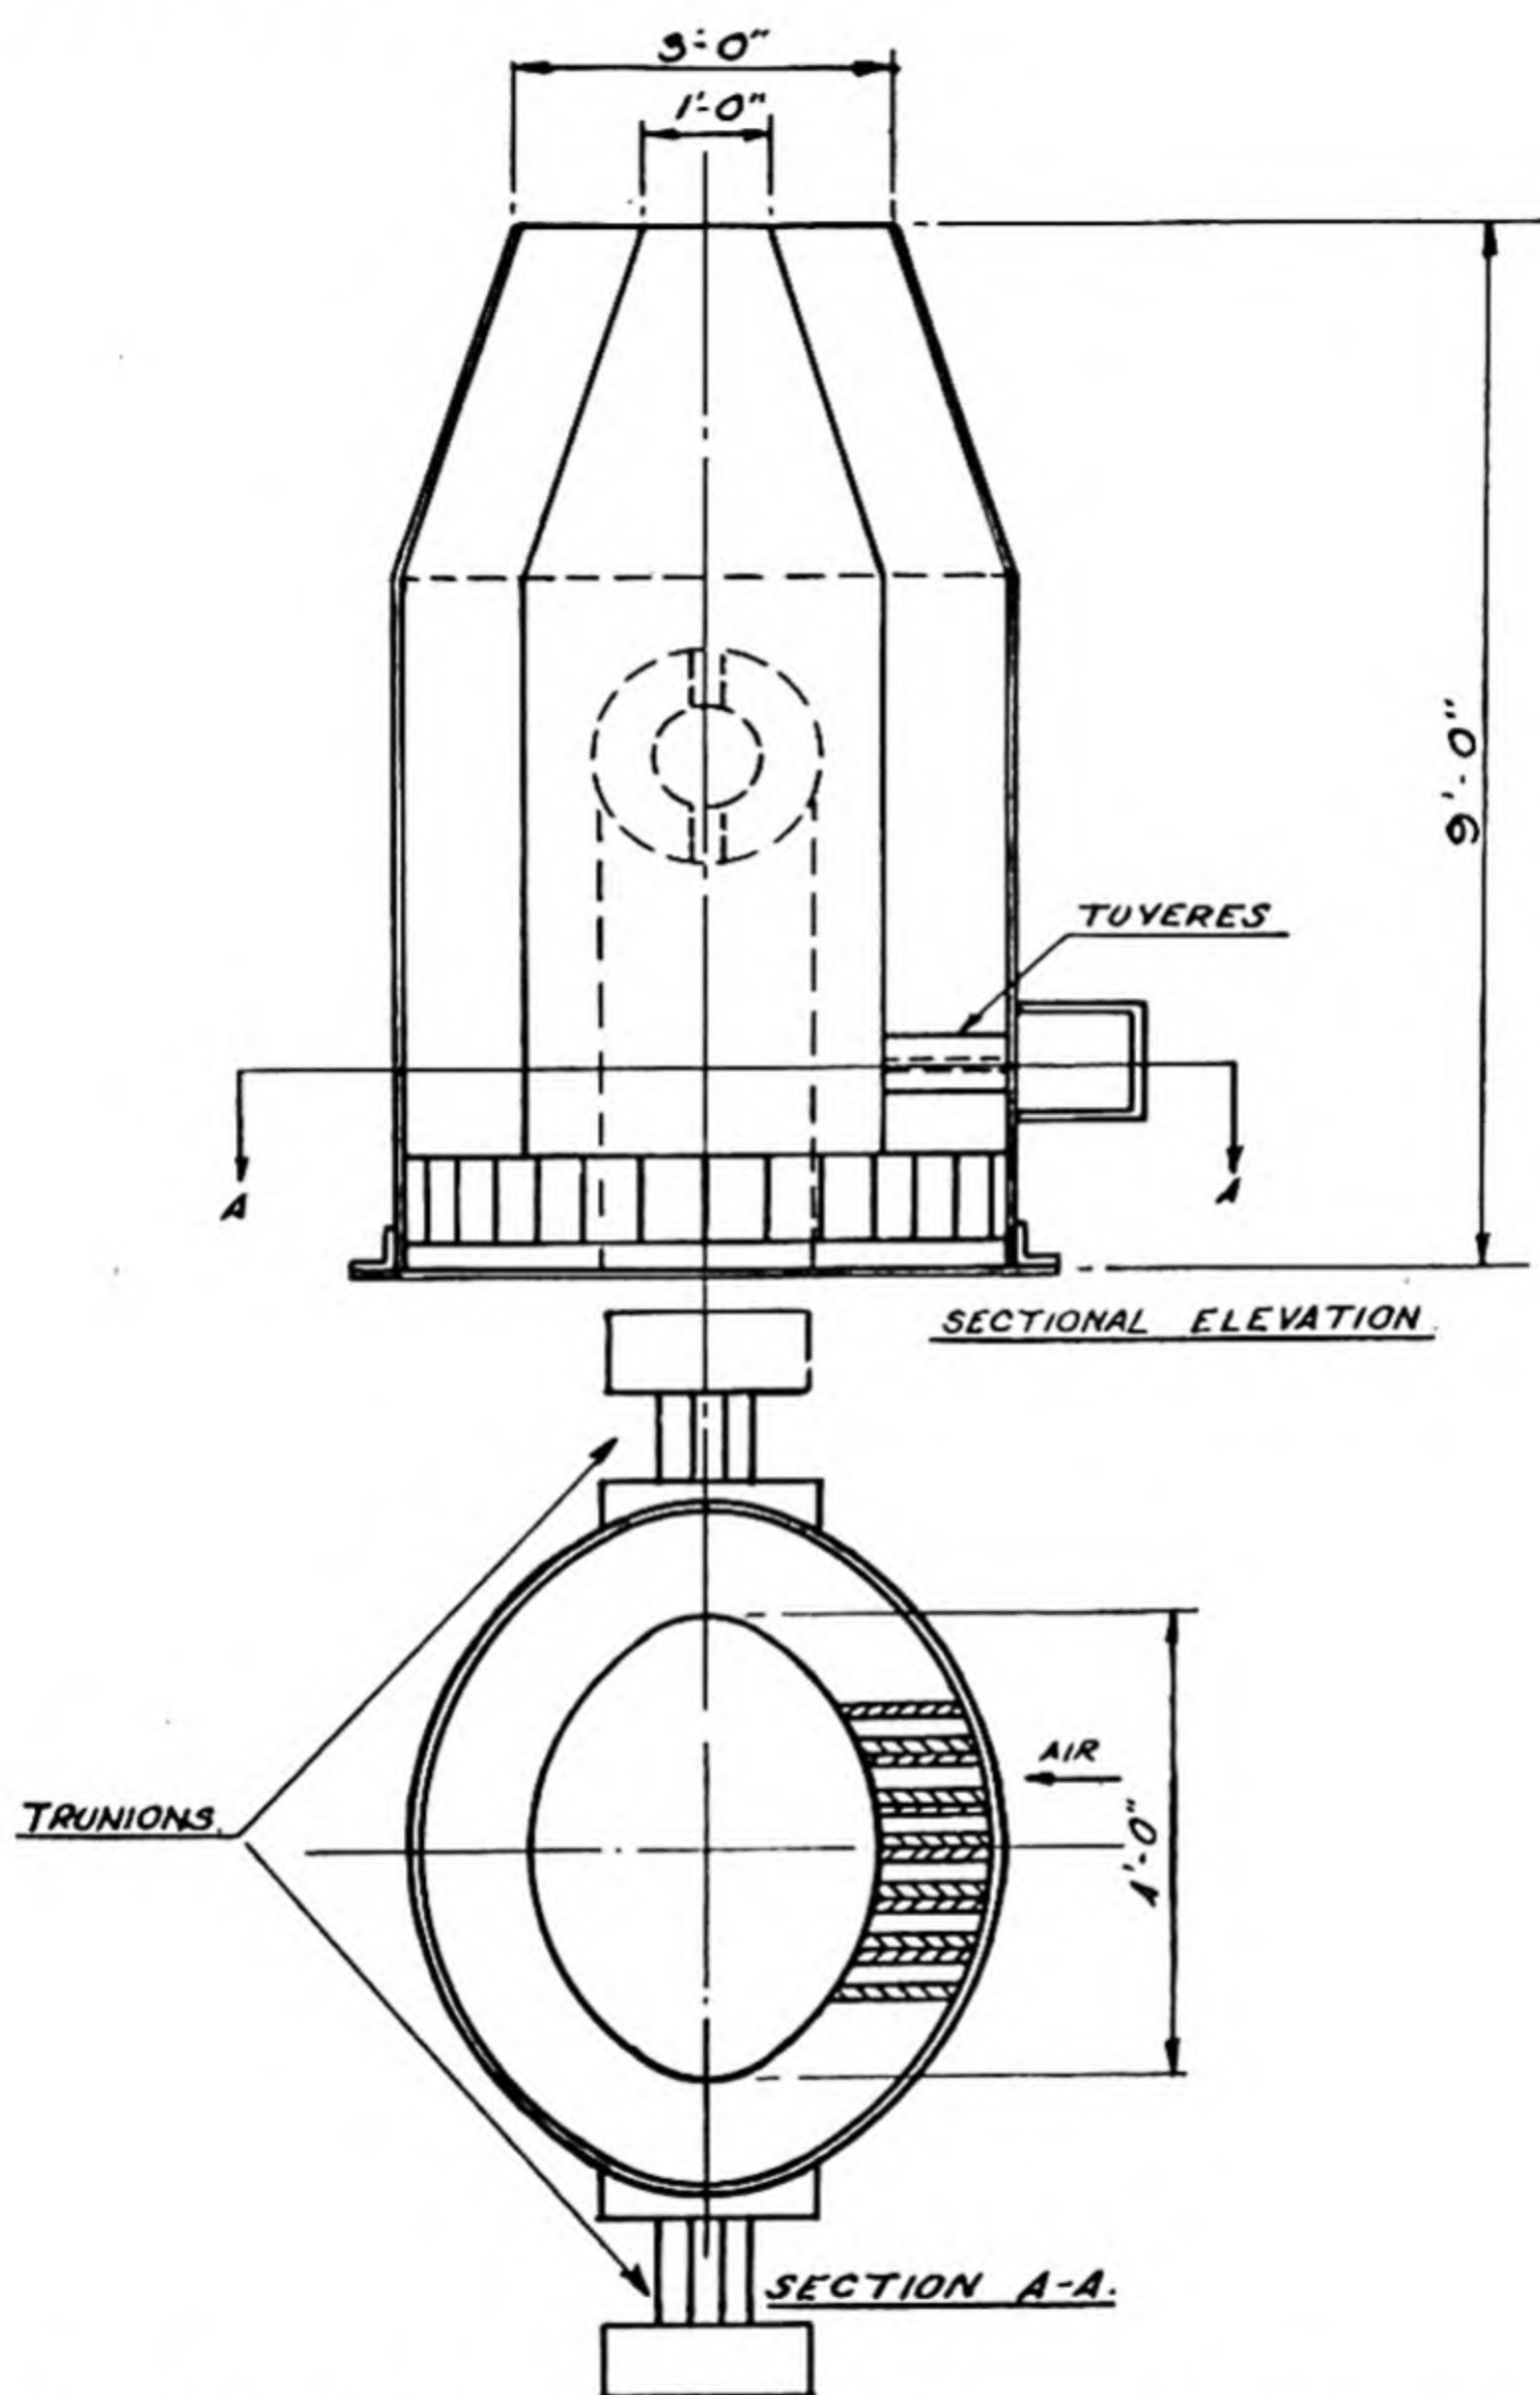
8. Two-ton Side-blown Bessemer Converter for Steel Casting Manufacture.
